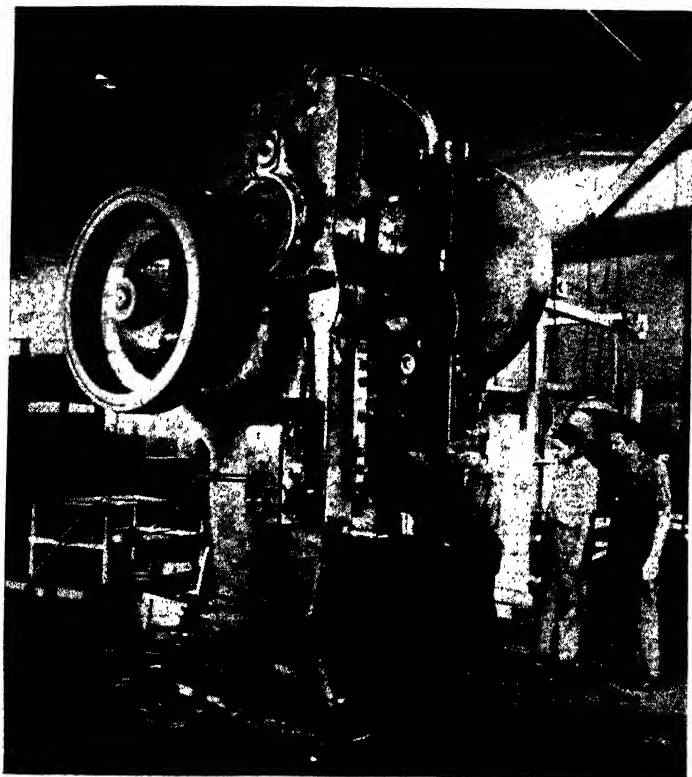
This 600-ton mechanical press pays for part of its cost by hot or cold blanking of parts from scrap plate. (Courtesy of R. G. LeTourneau, Inc.)
